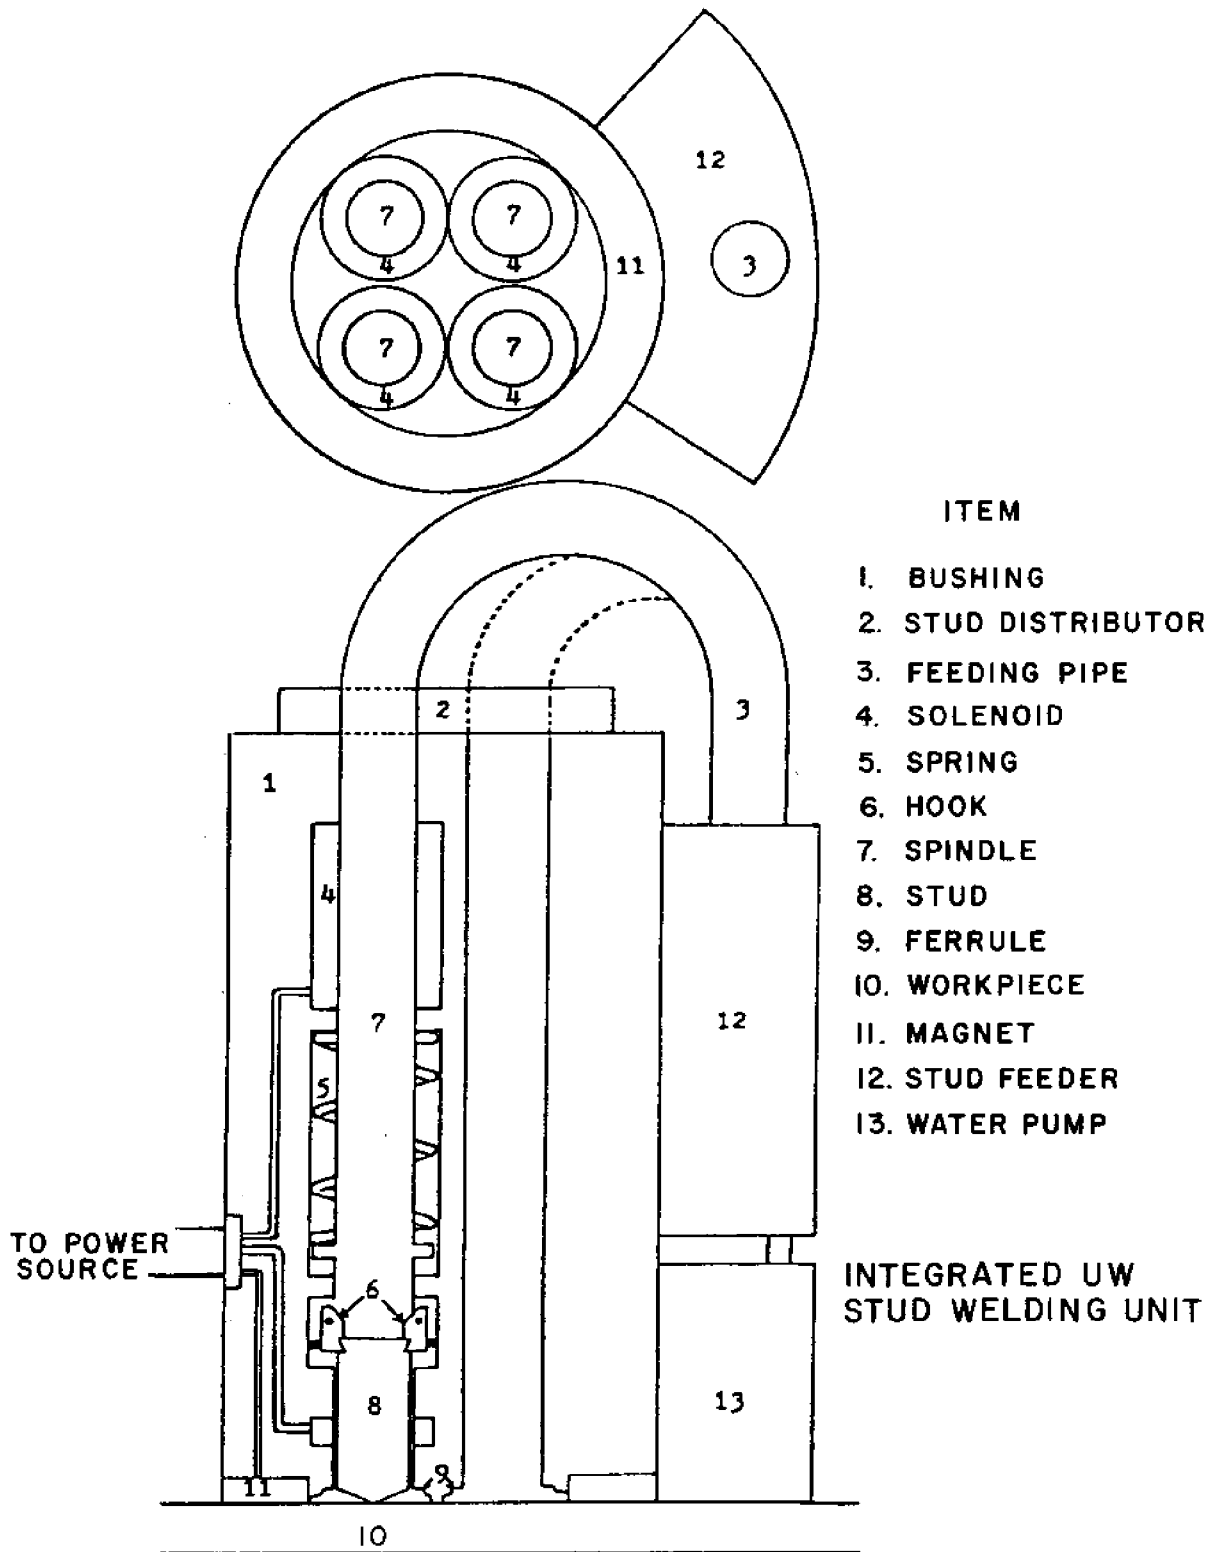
Conceptual design of integrated underwater arc stud welding system
